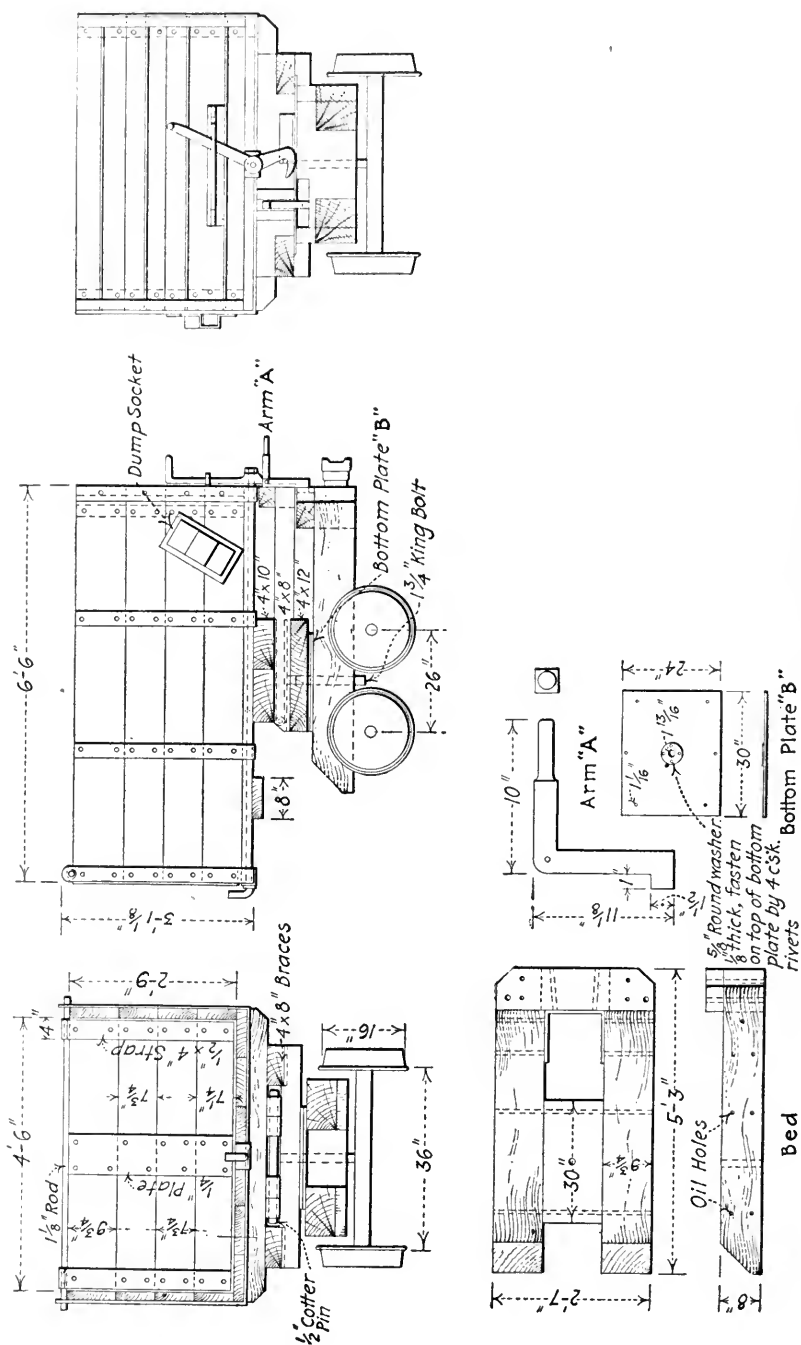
OAK STOCKPILE CAR FOR MOTOR HAULAGE.
